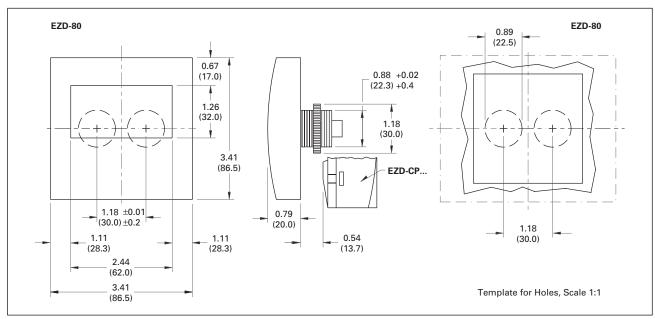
EZD-80 Series Dimensions in Inches (mm), Drawing Number MD05013005E
